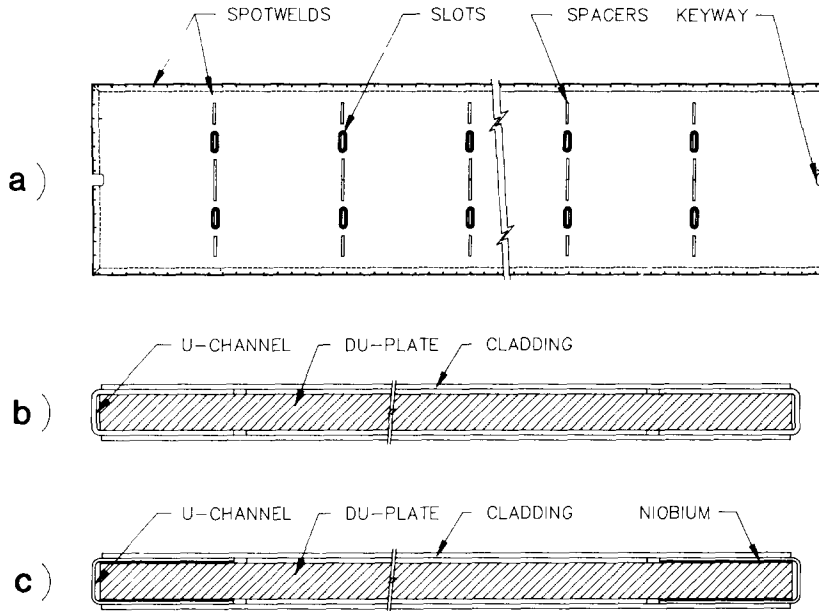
Schematic of a clad DU plate: (a) top view of an HAC plate showing the location of the spacers, slots and keyways; (b) cross section through a clad HAC plate; (c) cross section through a clad EMC plate.
